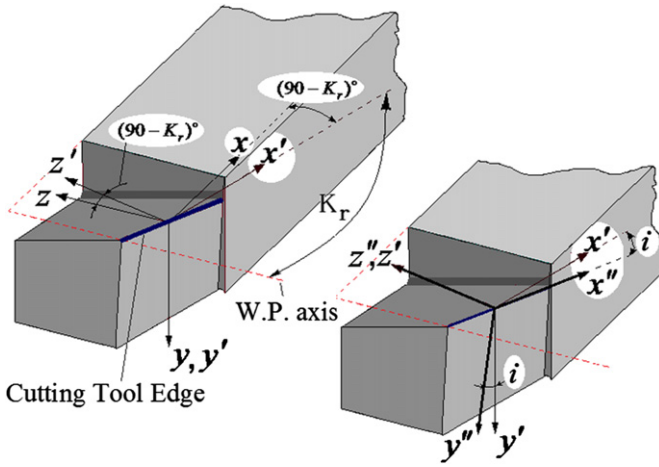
Cutting tool in oblique turning ( $i \neq 0, K_r \leq 90^\circ$ ).
